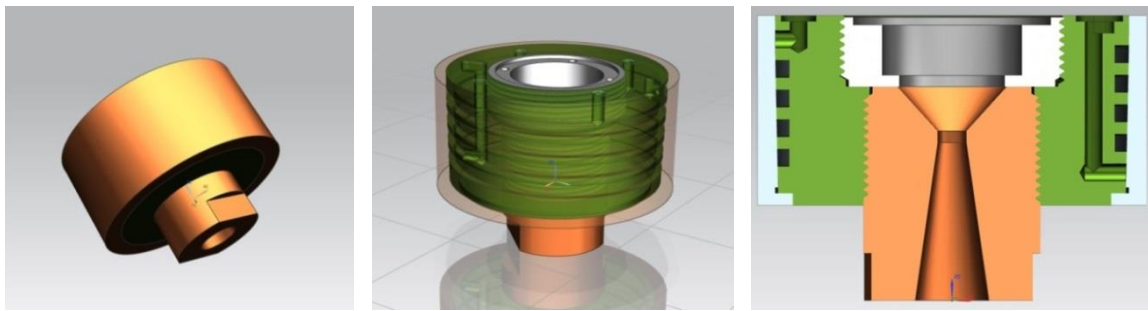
Assembly of the new nozzle. Left: external view; Middle: perspective drawing; Right: cross section with flange
